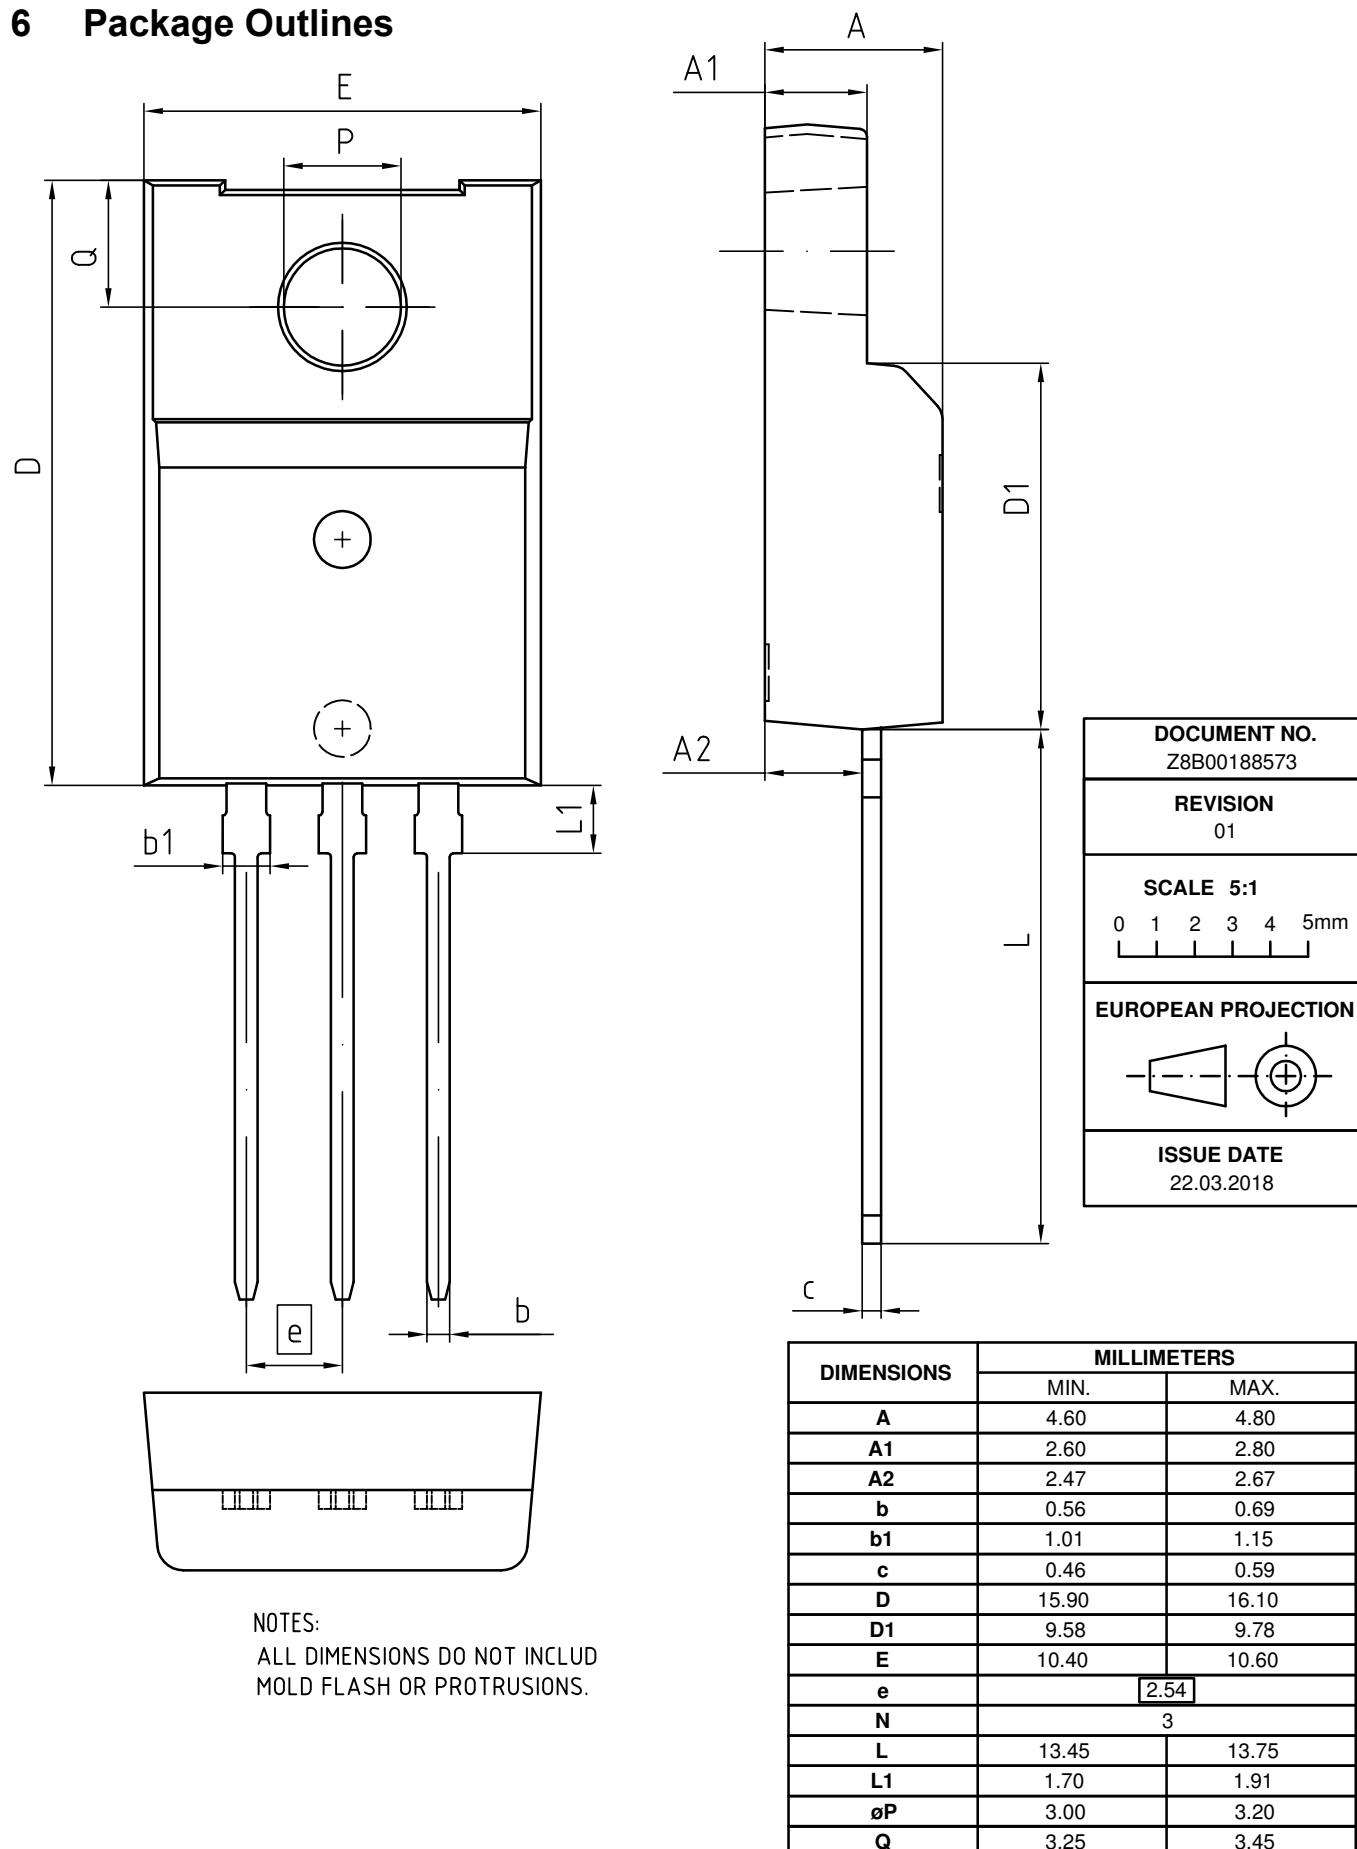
Outline PG-TO 220 FullPAK - Narrow Lead, dimensions in mm
